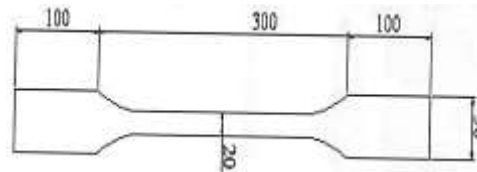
Tensile Test Specimens for Material of Metal Sheet
